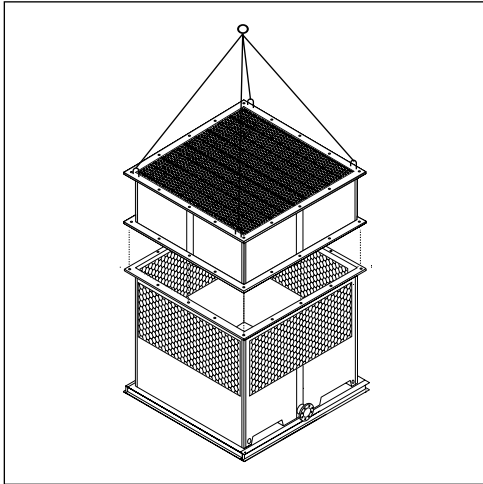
Lower body installation for a Single Fan Tower (RT-D or RTP-D)
